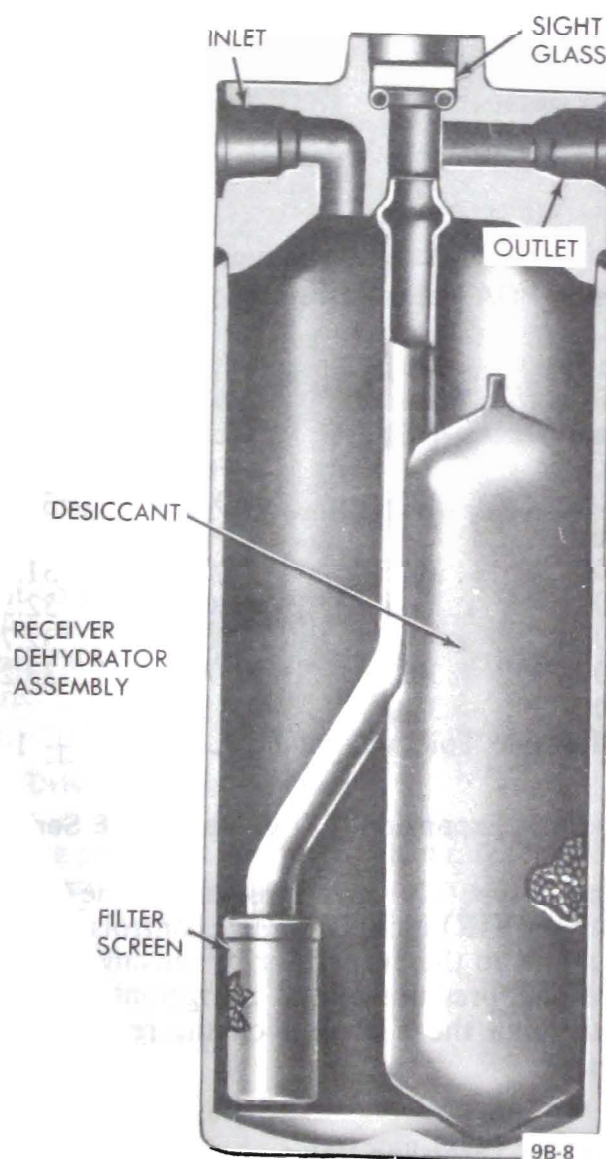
B-2 Receiver - Dehydrator Assembly - X Series
